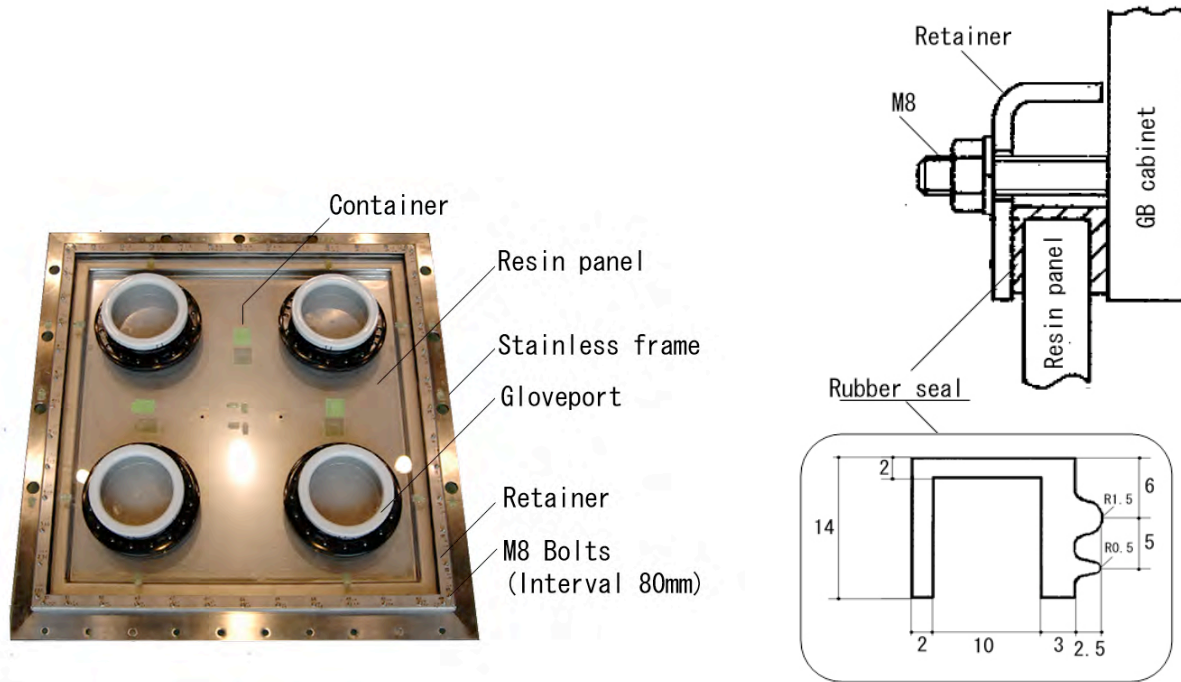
Test specimen of glovebox window and chloroprene rubber seal
